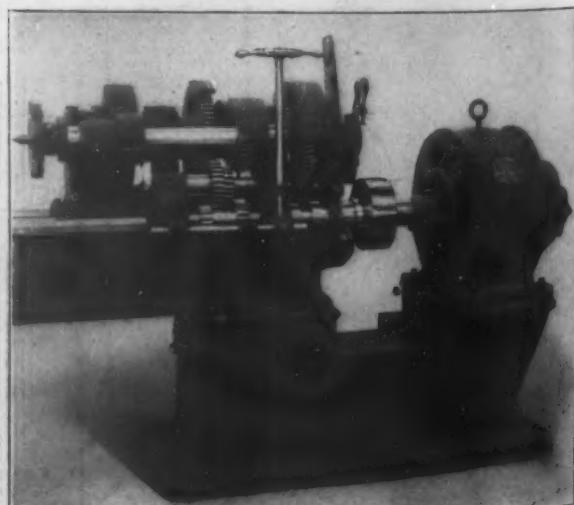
Former Partial Guarding of Small Lathe Headstock.
